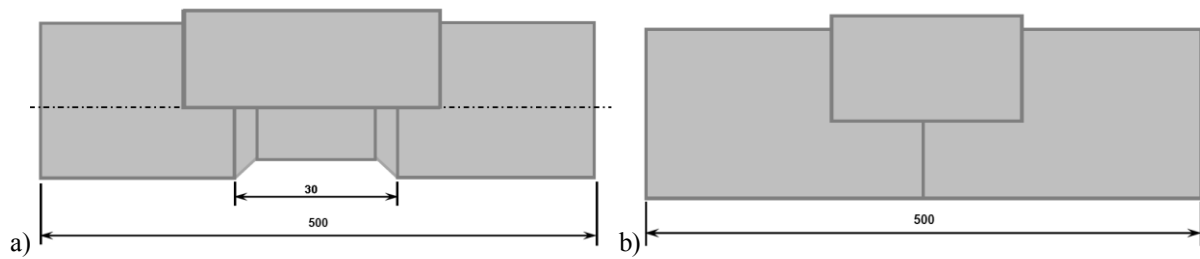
All-weld metal test specimen a) 3 and b) 4.
